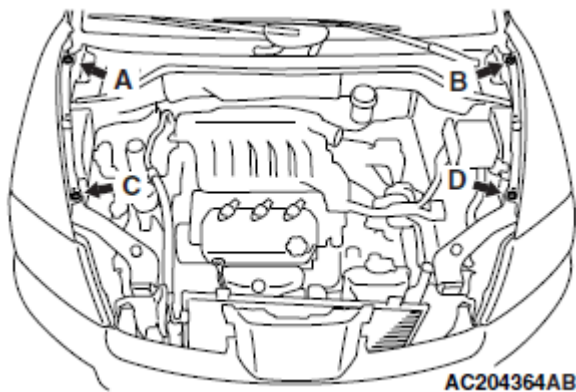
Identifying Engine Assembly Components With Torque Specifications (1 Of 2)
